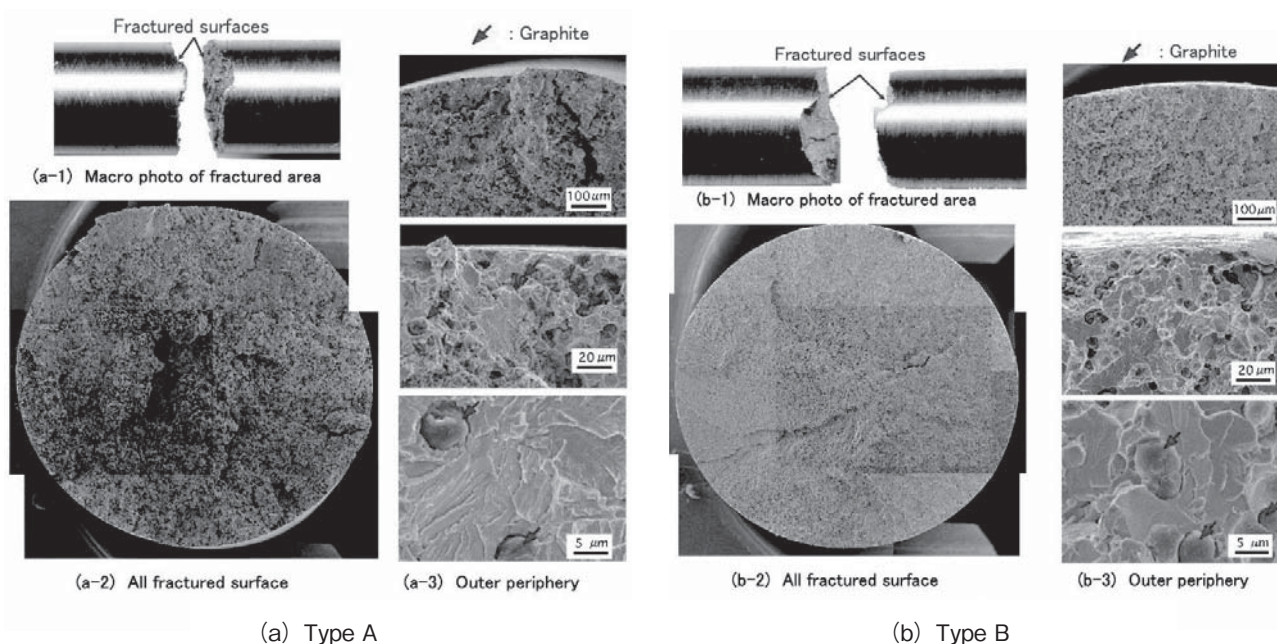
Macro photos and SEM images of fractured area by tensile fractured test
